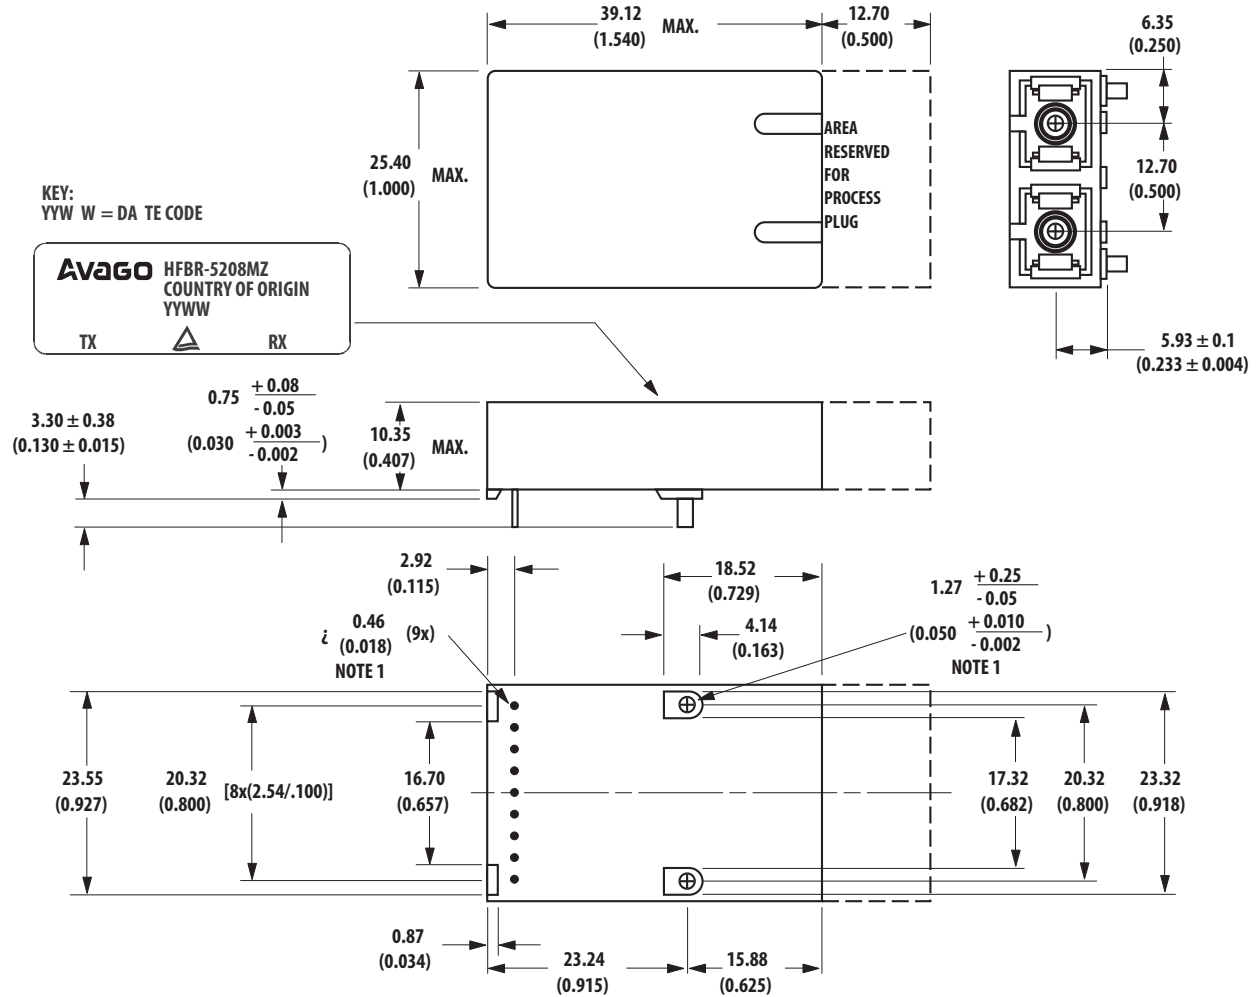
Package Outline Drawing for HFBR-5208xxxZ
